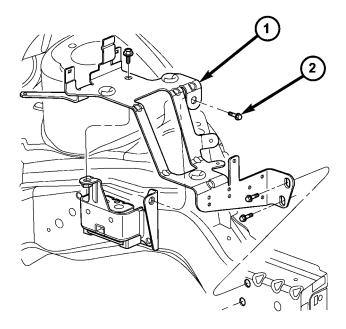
Gear Shift Cables and Bracket at Transaxle
